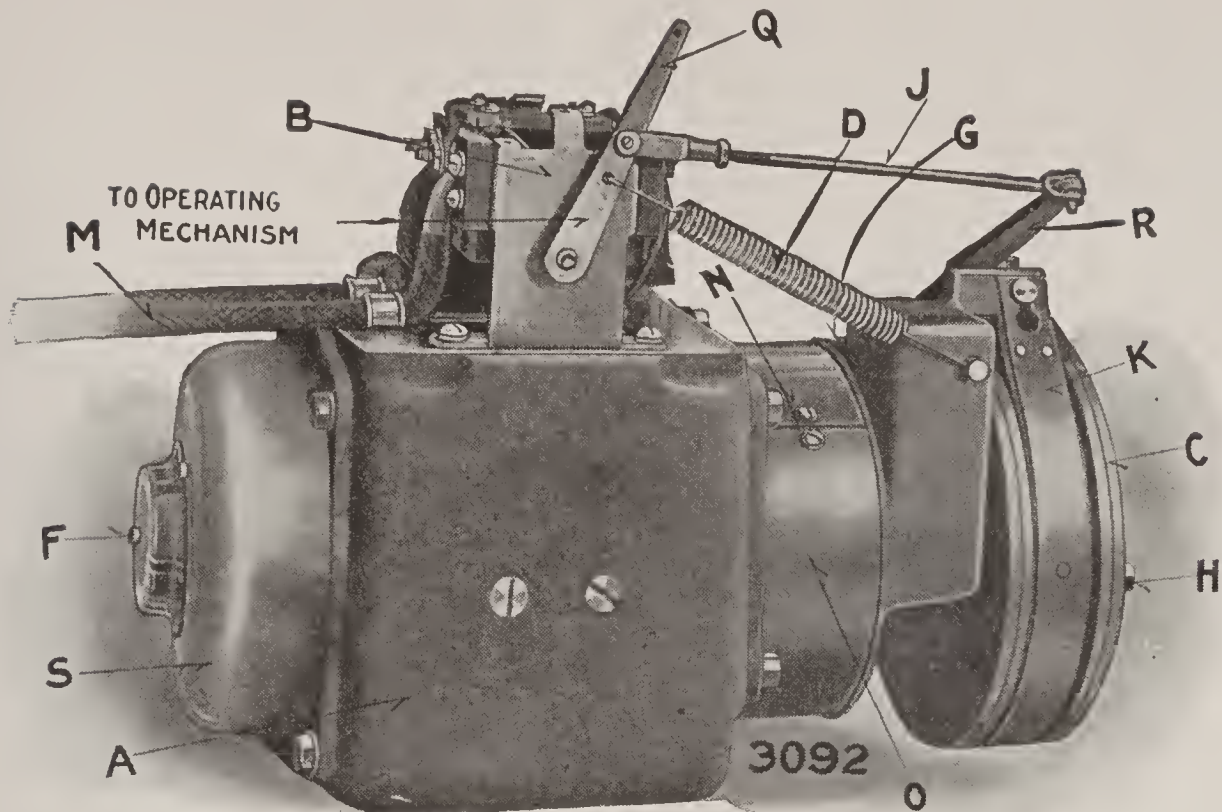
Wagner Control Switch of Drum Type. A—Starter Frame; B—Switch Support; C—Outside End Plate Gear Box; D—Return Spring; F—Oil Hole Screw; G—Self-Closing Oiler; H—Oil Plug; J—Connecting Rod; K—Brake Band; M—Battery Leads; N—End Plate Screws; O—Back End Plate Shield; Q—Starting Switch Lever; R—Brake Band Lever; S—Front End Plate Shield
